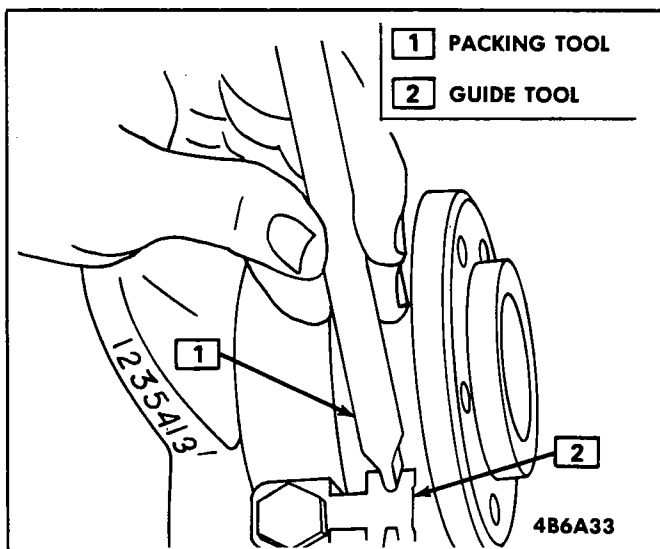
Packing Short Pieces of Rope Seal Into Guide Tool and Cylinder Block
